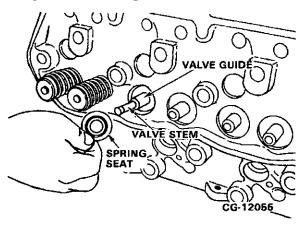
Install Spring Seat (Used Prior to S/N 072707)
